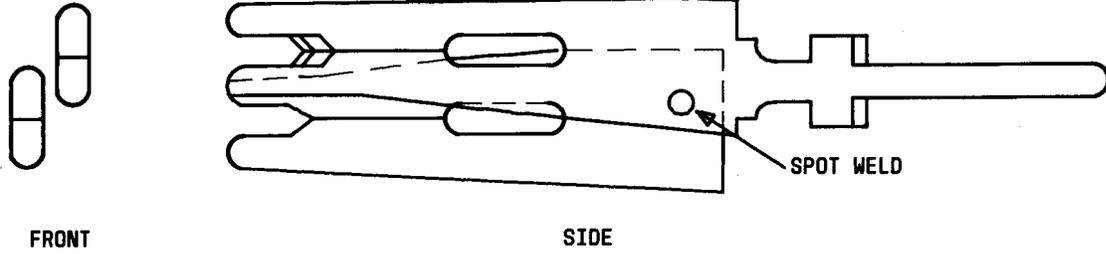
Views of Terminal Used on 78-Type Connecting Block
